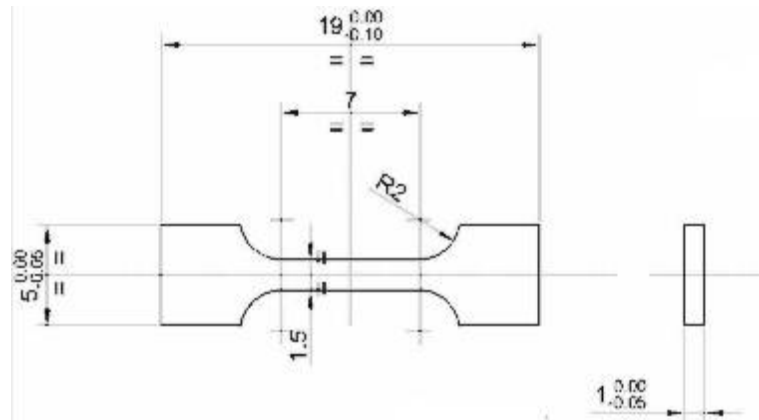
Tensile specimen (T 19-type), drawing by CEA.
